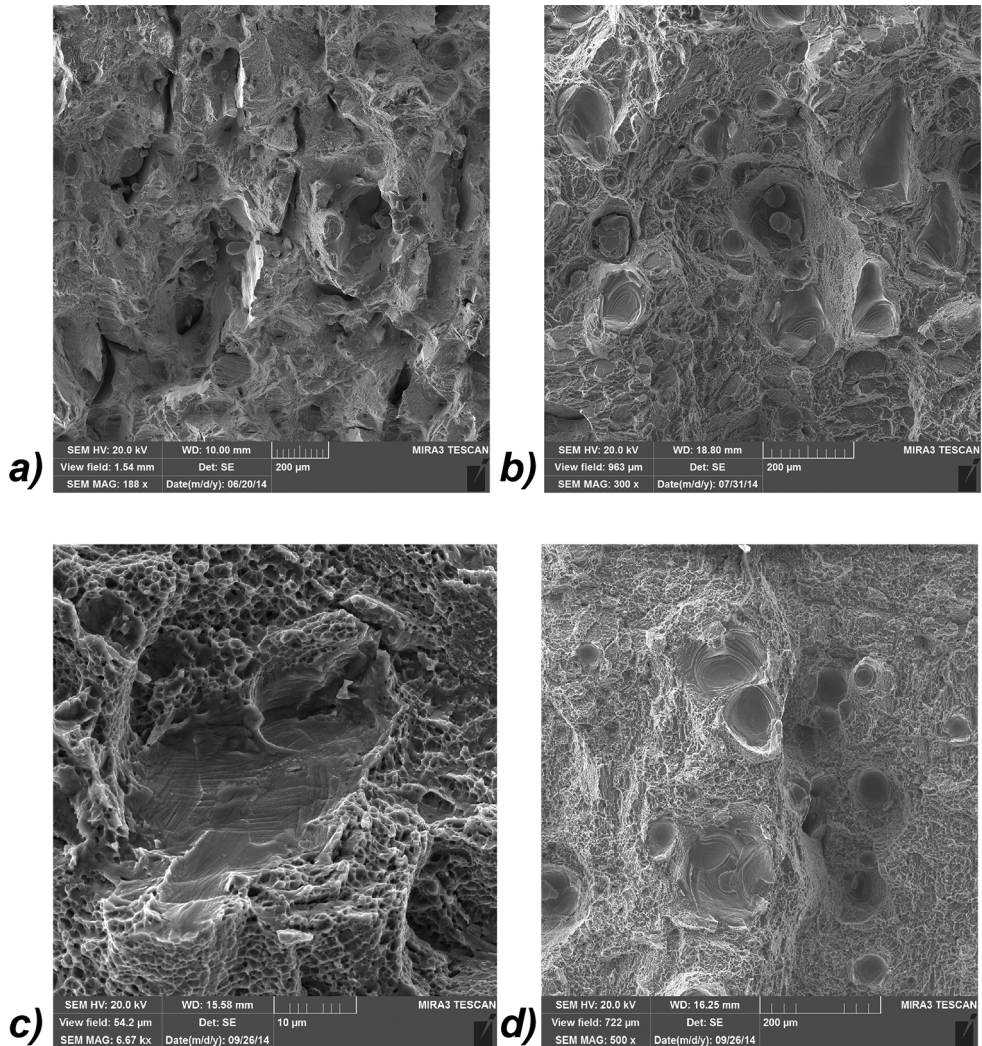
Fractography of Inconel 718 (a, c) and Ti-6Al-4V (b, d) specimen fracture surfaces before (a, b) and after heat treatment (c, d).
